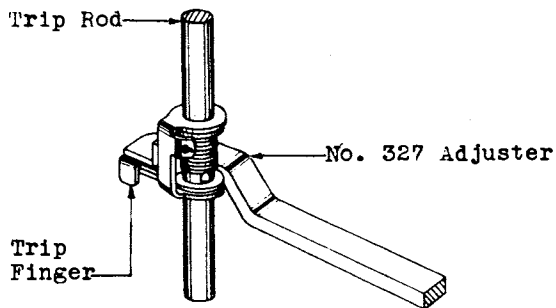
Method of Adjusting Clearance Between Bottom of Trip Finger Flange and Trip Lever
